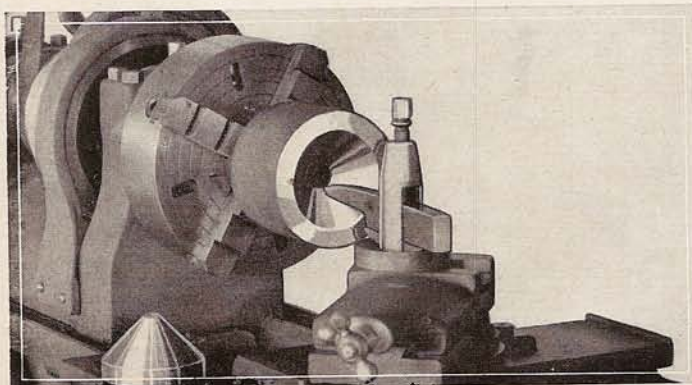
Machining a Conical Punch and Die Using the Compound Rest for Correct Tapers of both Punch and Die
